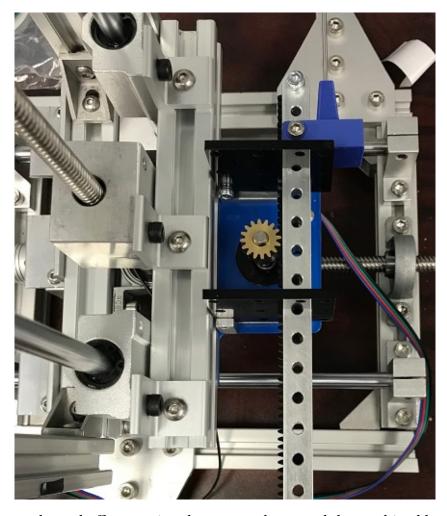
Fasten the end-effector using the 150 mm beam and the machined brackets. Make sure the base stage can move smoothly after the assembly. It is at this position that you should know where the tip of your needle is in the robot frame
